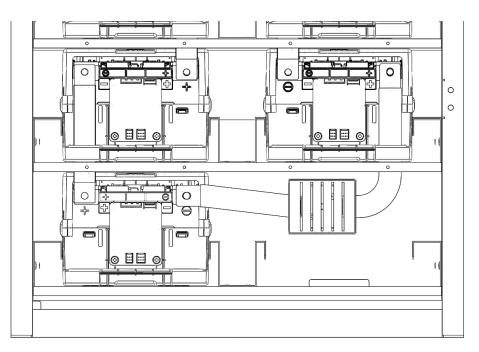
Rack Fuse Cover (Fully Assembled; Front View)
